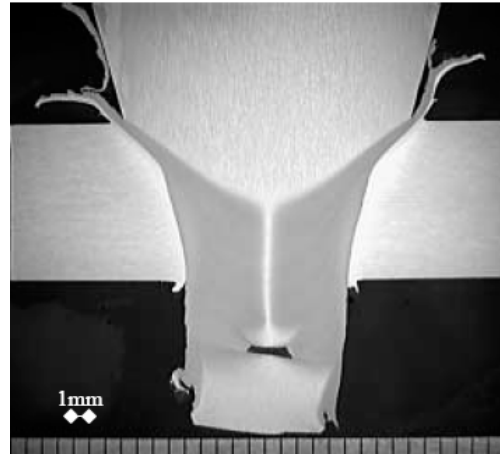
Macrograph of a FTP weld^[110].
